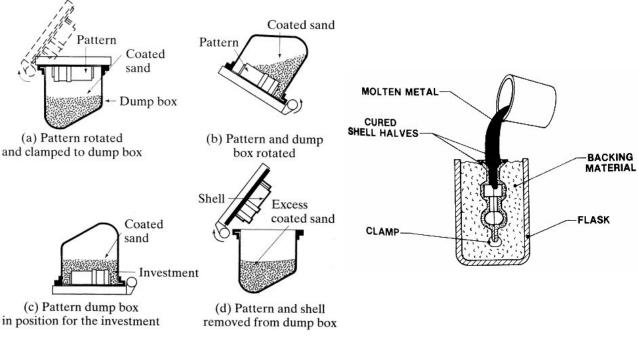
Making the shell-mold [Source: Kalpakjian & Schmid] Figure 6. Shell mold casting
